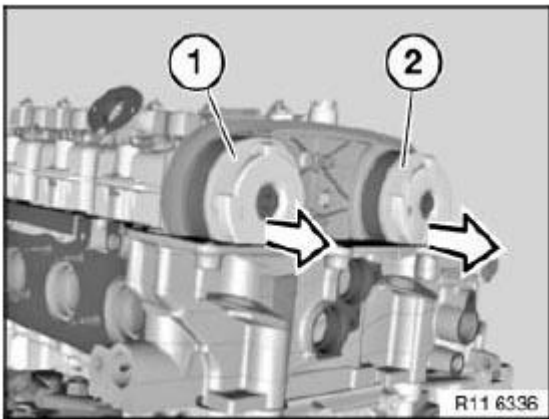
Identifying Exhaust Adjustment Unit And Inlet Adjustment Unit
